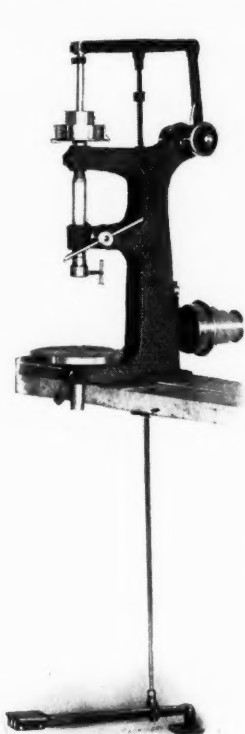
No. 27 Bench Drill equipped with Lever and Treadle Feed
